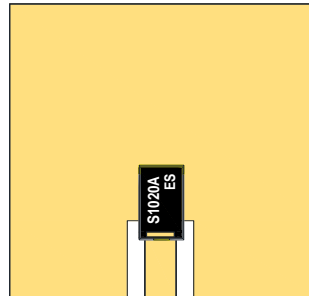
Placing the S1020A on the 2 Points of the PCB Surface
